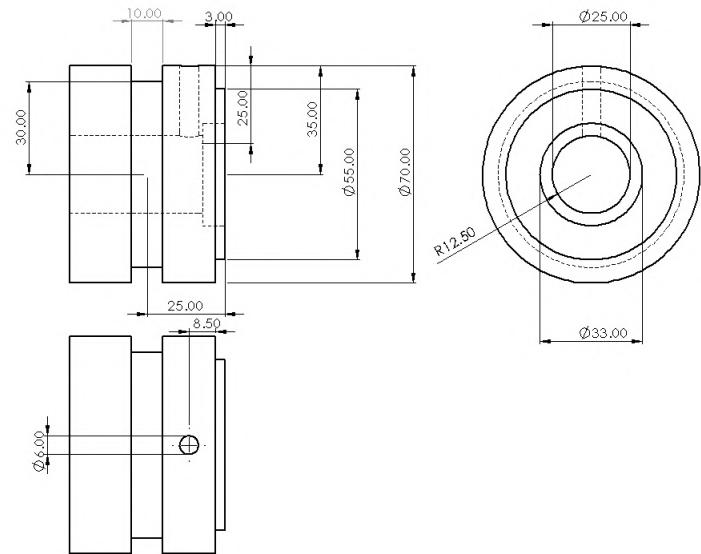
2D Drawing of the large (All dimensions are in mm)
